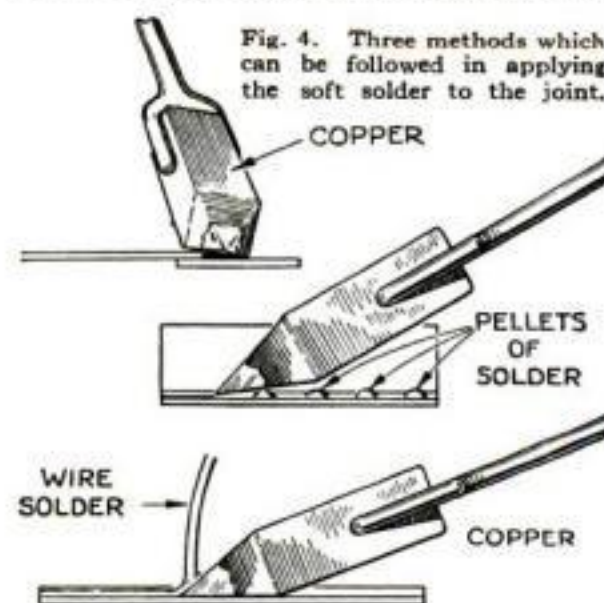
Three methods which can be followed in applying the soft solder to the joint.
